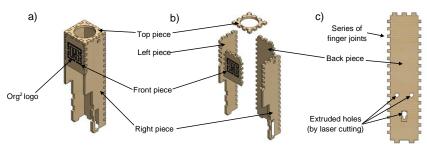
MAIN BODY OF THE SENSOR CHAMBER WITH NO INTERNAL COMPONENT. A) THE CHAMBER WHEN COMBINED USING FINGER JOINTS WITH B) AN EXPLODED VIEW TO FURTHER ILLUSTRATE. C) BACK PIECE SHOWING EXTRUDED HOLES FOR BOLTS AND SERVO MOTOR OPERATING THE MECHANISM.
